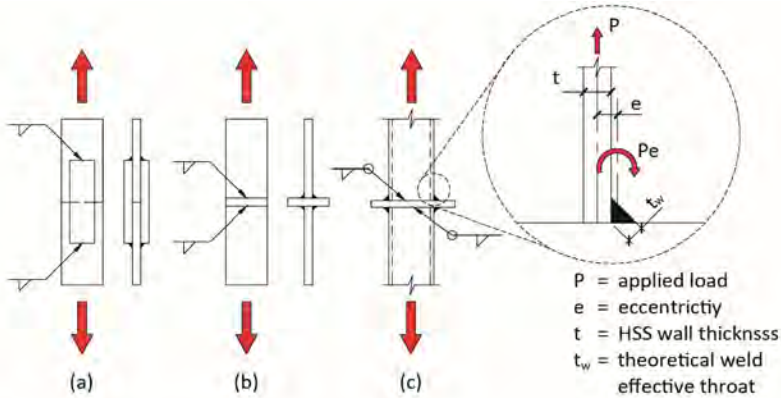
Fillet-welded (a) lap-splice, (b) cruciform, and (c) HSS-to-plate test specimens
